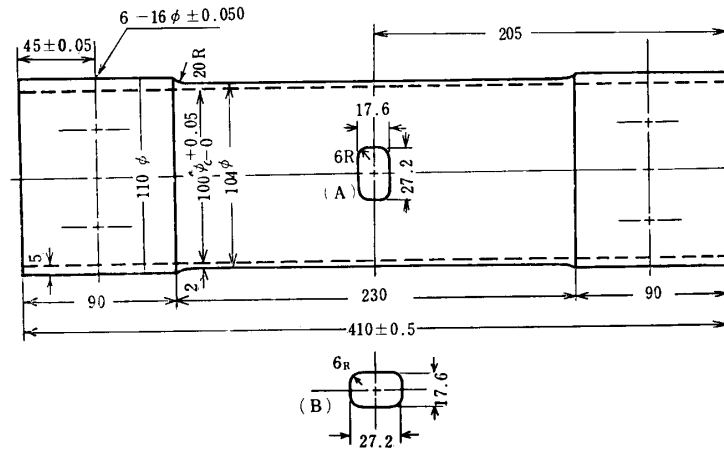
Large thin cylinder test piece with (A) or (B) hole
